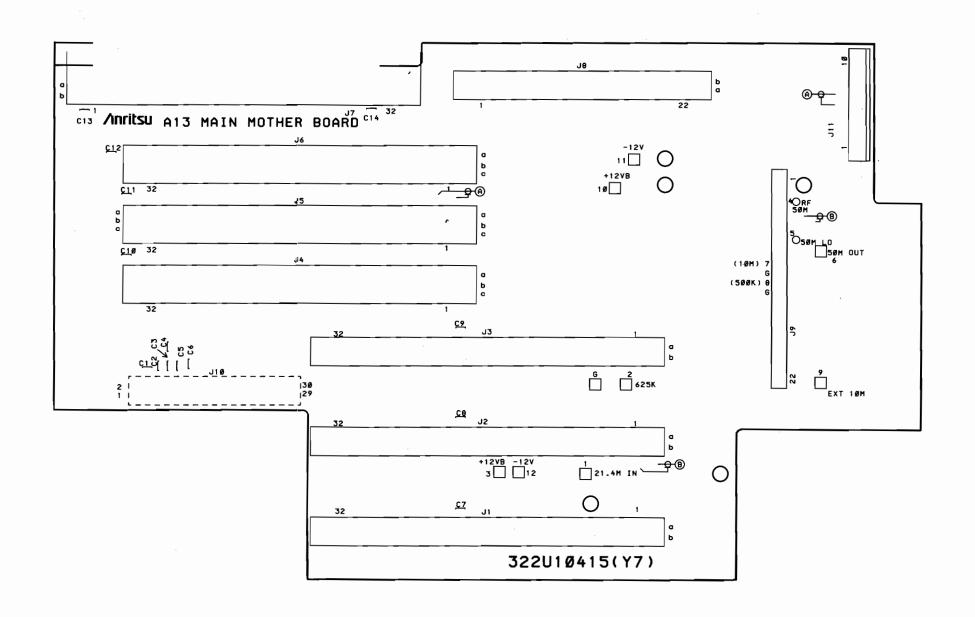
Al3 MAIN MOTHERBOARD PC Board Parts Layout 24
